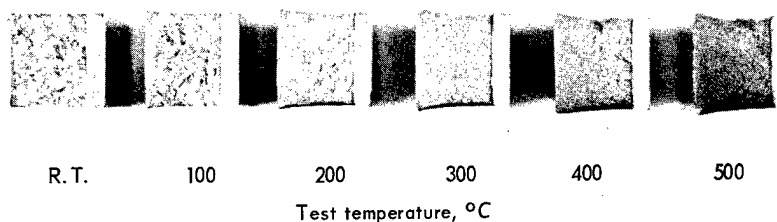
Fracture surfaces of 1041 alloy (Heat MS-60) (Neg. P67-8-1)
